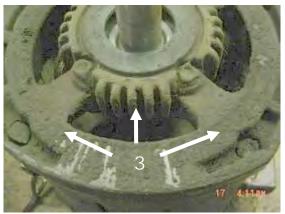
B (Front view). 34/35SI alternator damaged by excessive contamination with the fan off.
